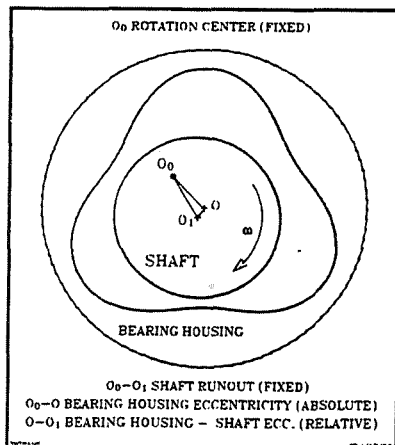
Geometry of a Free-Mounted, Three-Wave Journal Bearing with Fixed Shaft Runout.
